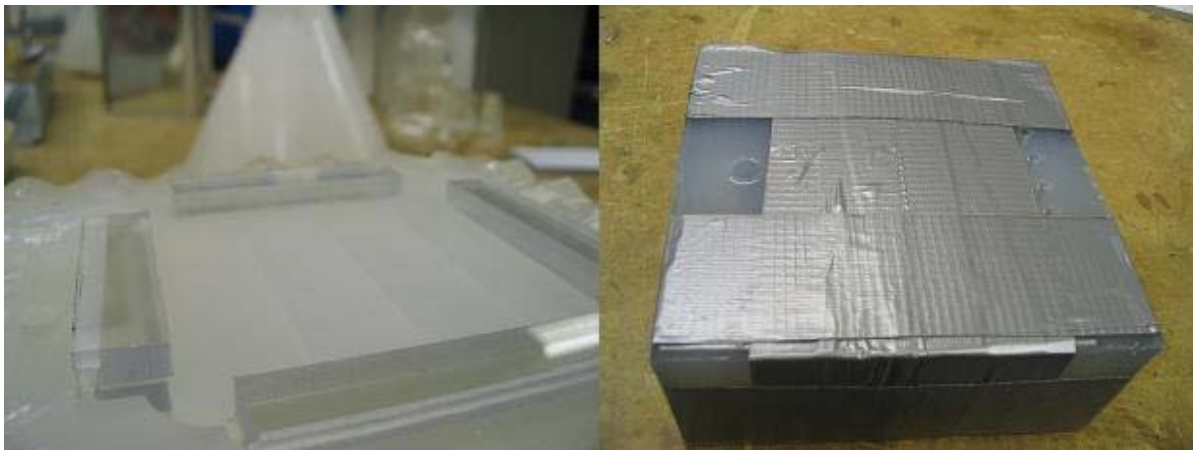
(Left) Close-up of the bottom half of the mold with polycarbonate pieces placed inside and (Right) sealed mold with gate and valves showing. Note that the wires are not shown in either of these pictures.
